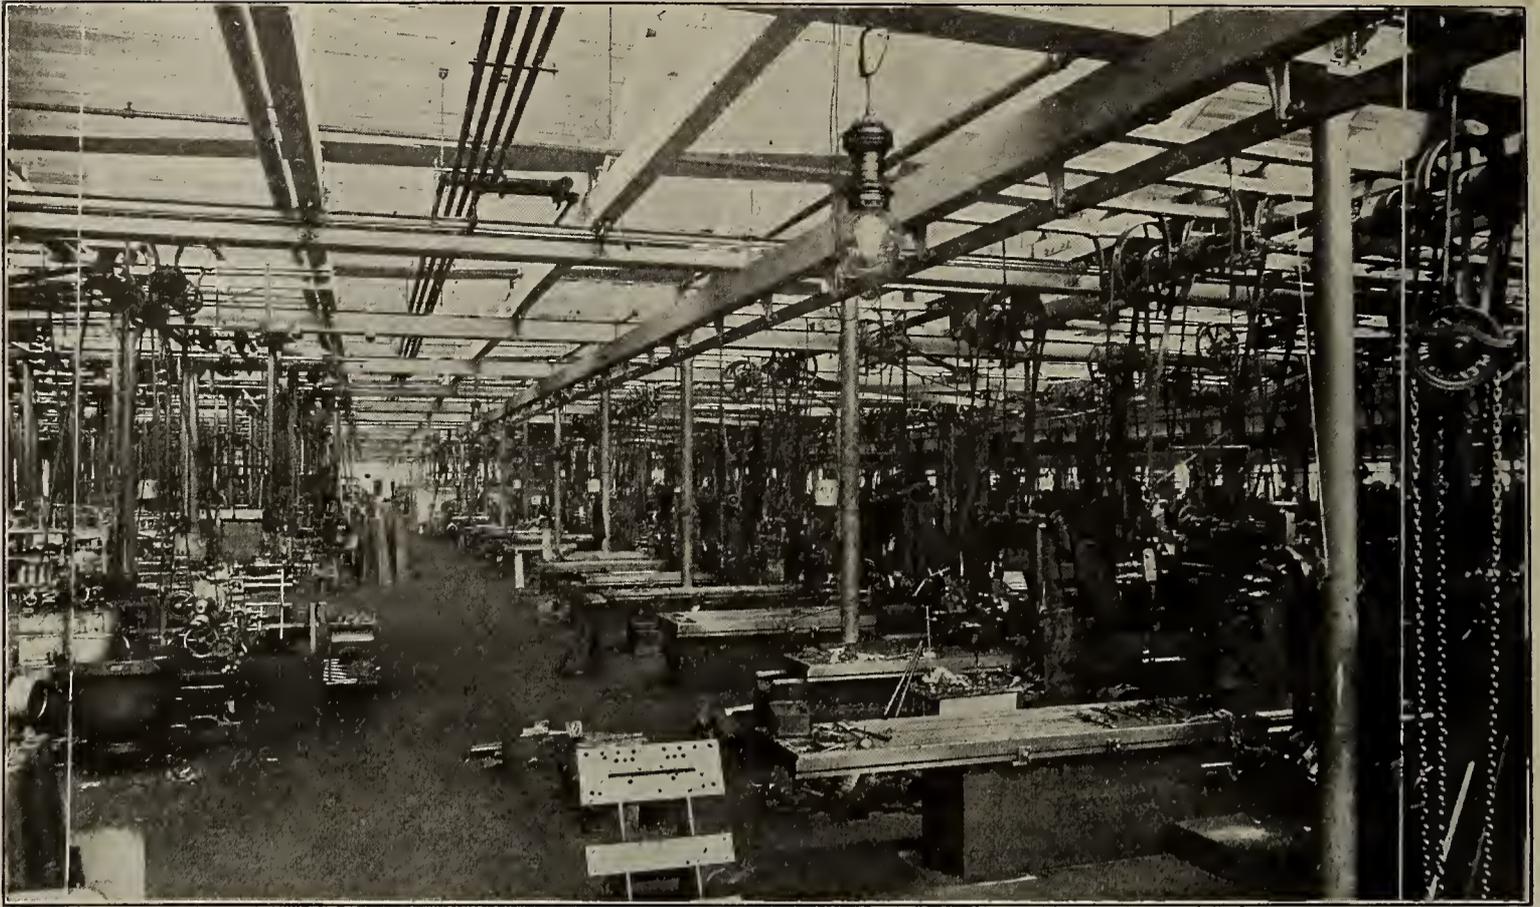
GENERAL VIEW OF MACHINE SHOP PROPER.
